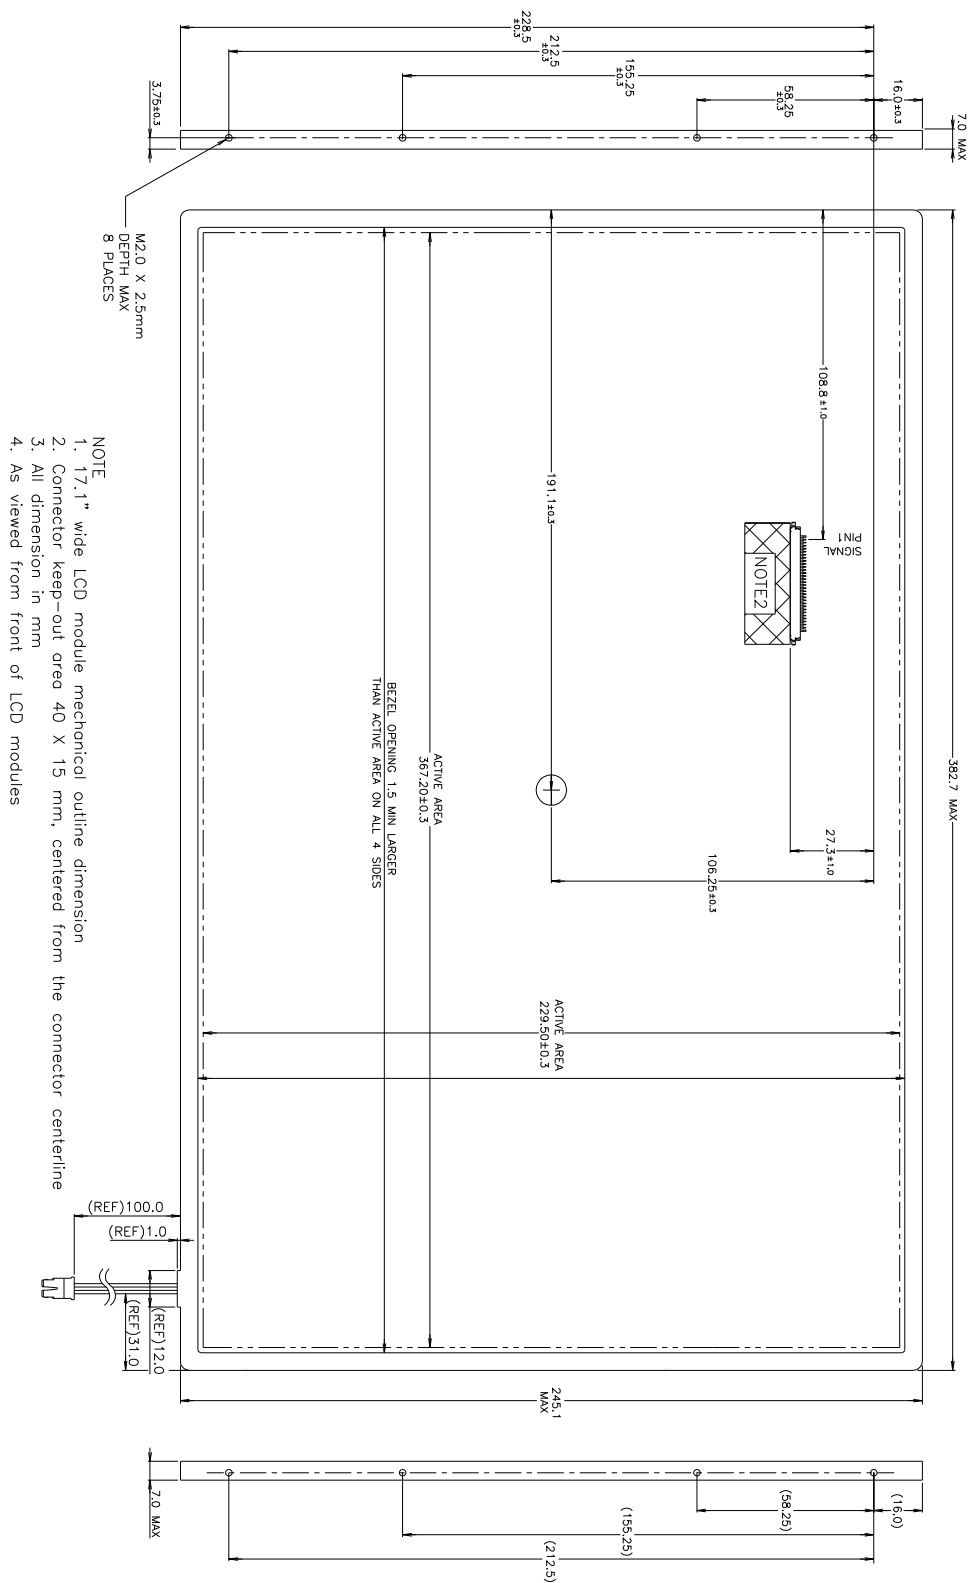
17.1-inch Wide Single CCFL Mechanical Outline Dimension (Front View)
